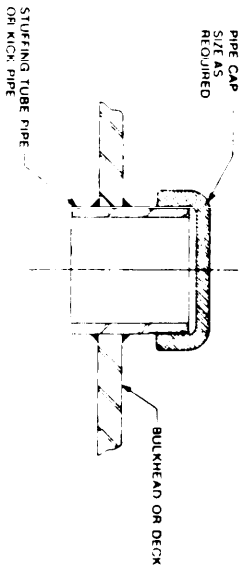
B46. Sealing unused stuffing tubes in medium steel bulkheads and decks.
